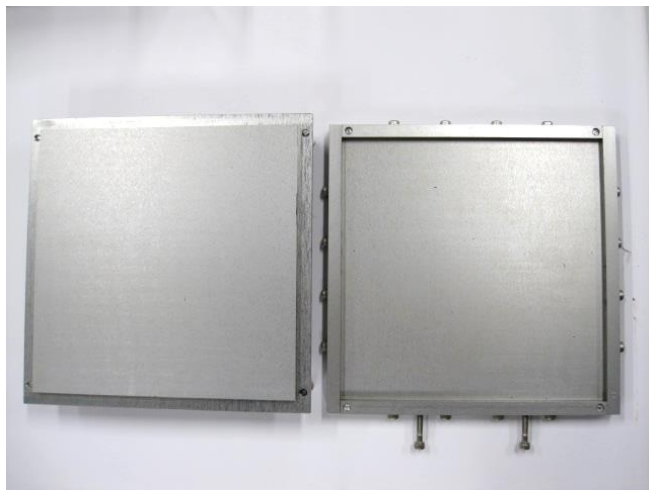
Aluminum mold for making 200-200 mm composite plate.
